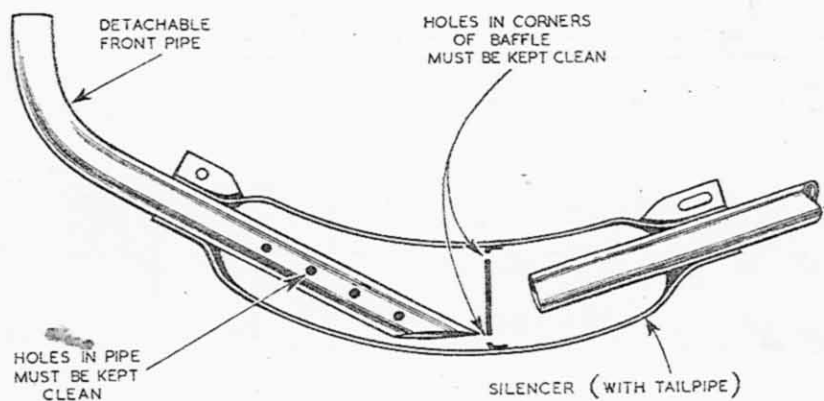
Silencer cutaway view, showing holes that need to be kept clean.
